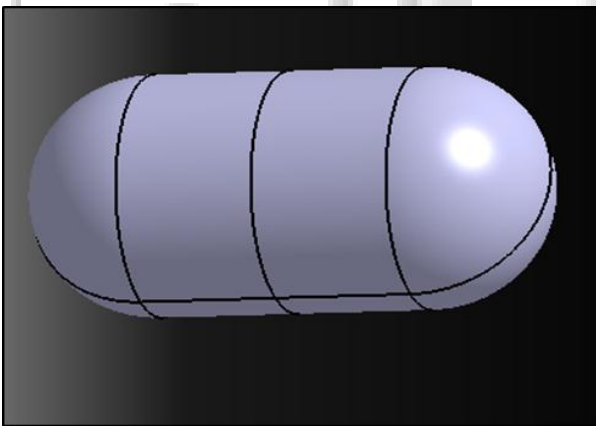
2D Drawing of Vehicle LPG Cylinder
